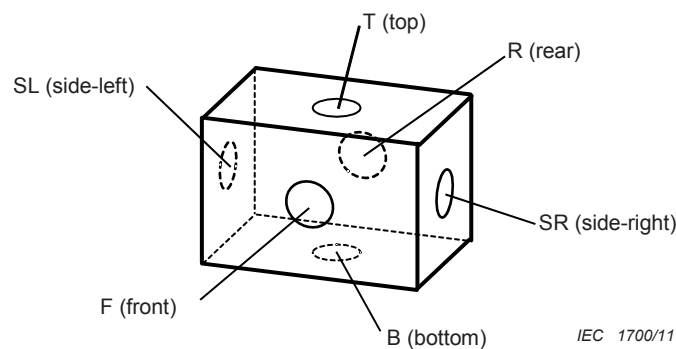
Syntax of surfaces of a forced air cooled generic subrack or chassis to be mounted into a cabinet
